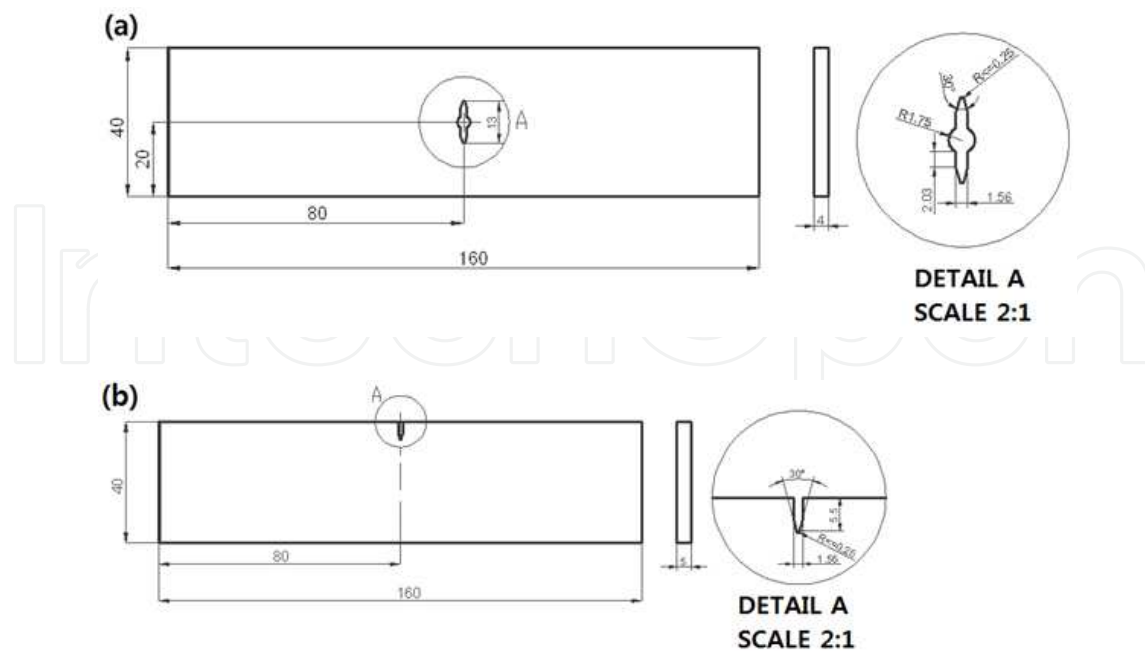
Dimension of fatigue crack growth test samples: (a) middle tension M(T)), (b) single-edge notched (SE(T)) [84].
